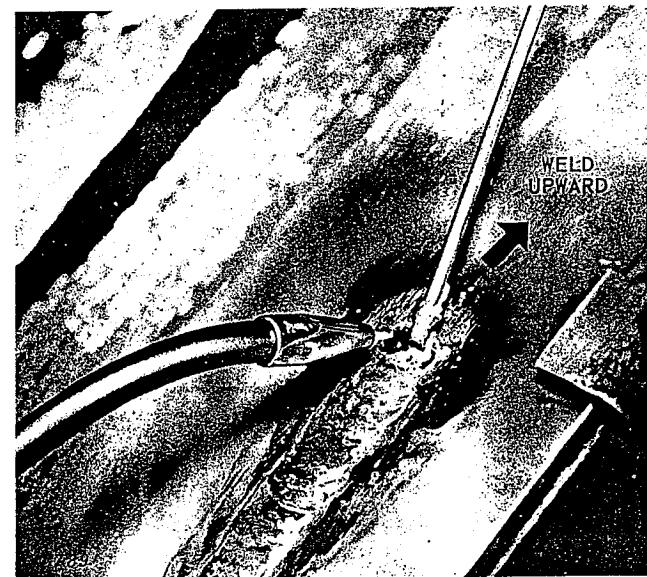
In Bronze Welding, The Weld Should Travel Upward At An Incline
